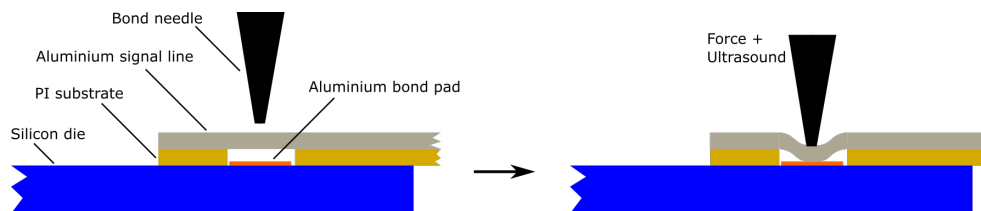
The TAB process used for the microcable-to-die interconnection. The bond needle ultrasonically welds the aluminium signal carrier directly onto the aluminium bond pad on the silicon die.
